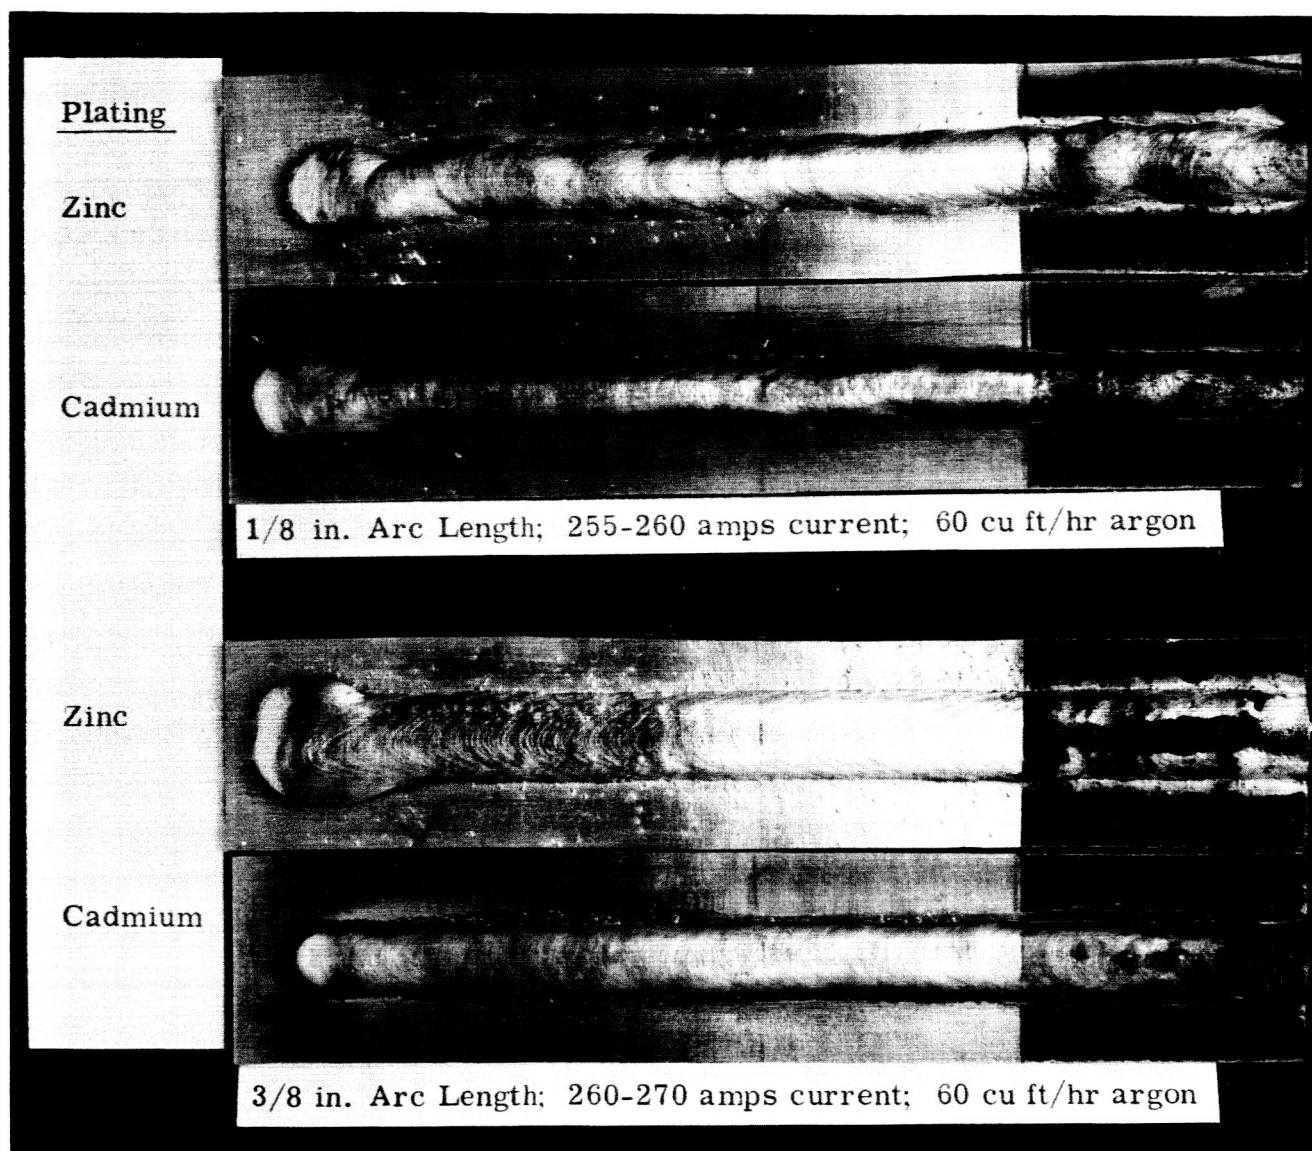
Photograph of weld beads deposited by Zn and Cd coated 2319 electrode
